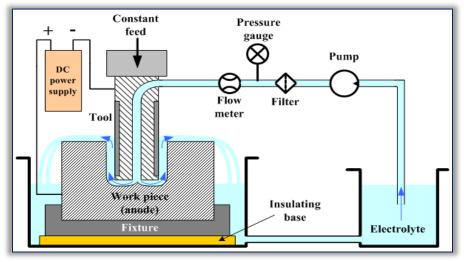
The components of Electro Chemical Machining equipment [4,5,6]
